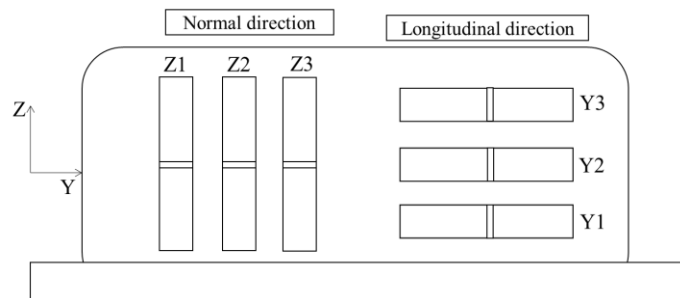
Uniaxial tensile test specimen dimensions.
